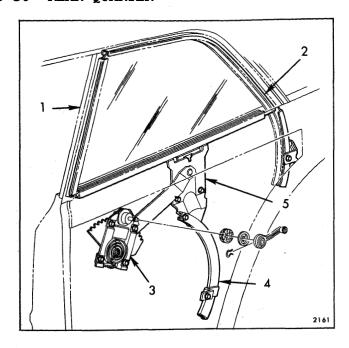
Rear Quarter Hardware - "X-11" Style
